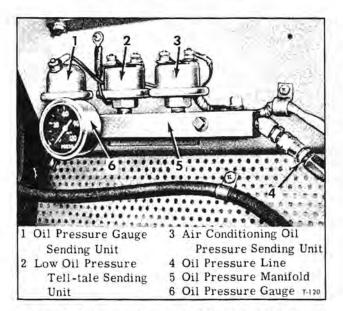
Oil Pressure Gauges and Manifold—6 Cyl. Shown
